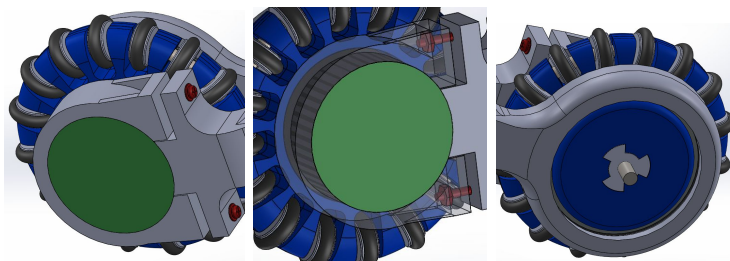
Fixation of the omniwheel, motor and bearing to the skeleton. The bearing is fixed directly, while the motor is fixed using a clamp to prevent assembling problems.
